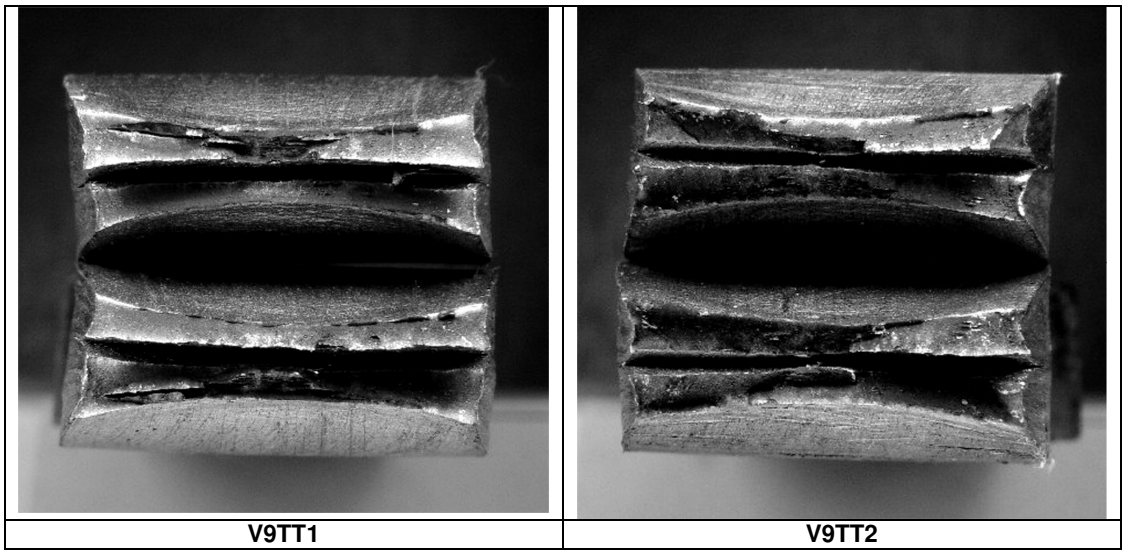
Fractographs of V9TT1 and V9TT2 specimens.
